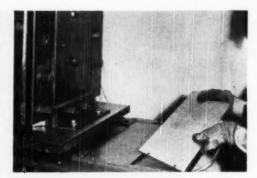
TOOL USED FOR PRESSURE SPOTTING HOLE CENTERS IN A
